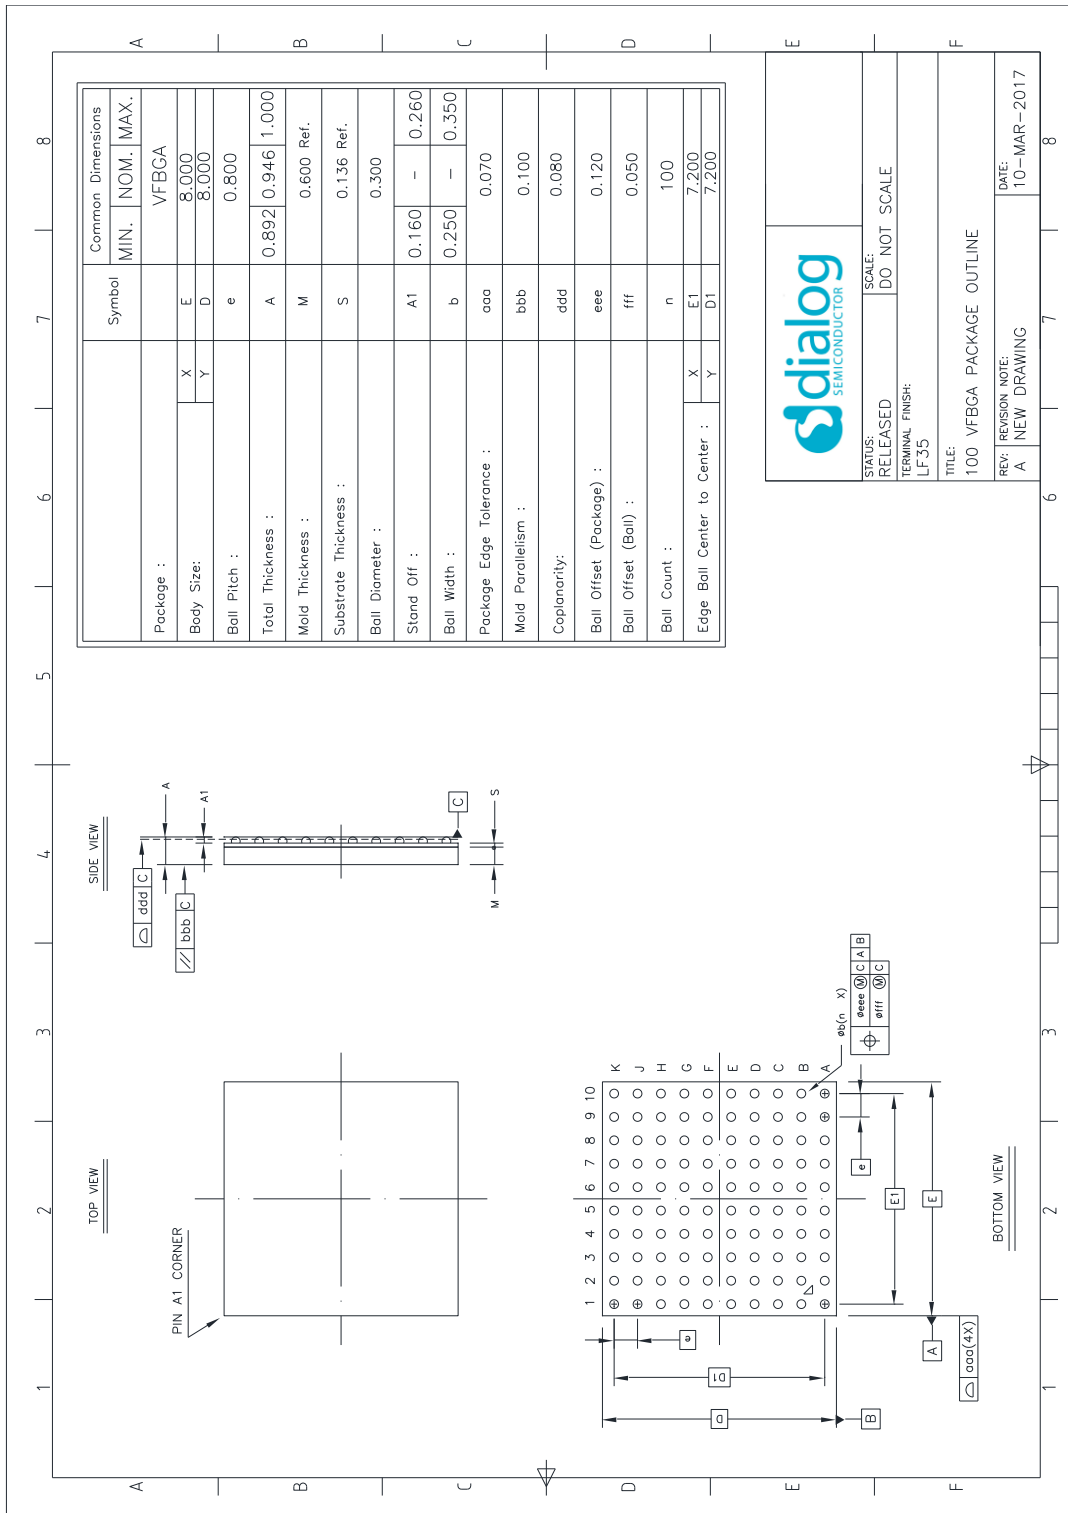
Package Outline Drawing 100 VFBGA 0.3 mm Ball Diameter
